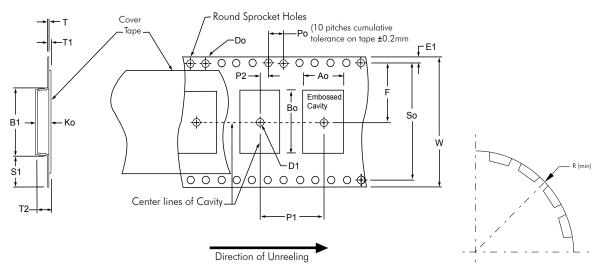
Standard Embossed Carrier Tape Dimensions
